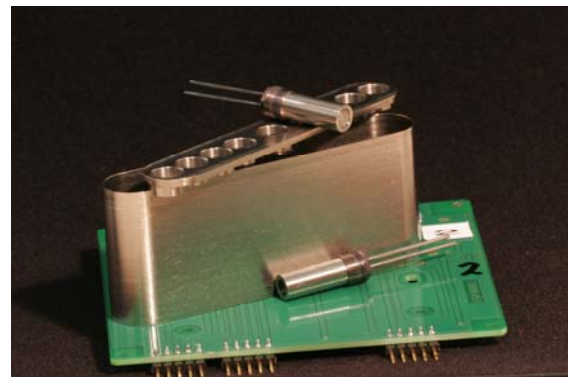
Plenum, plate, gas generators and electrical interface before assembly
